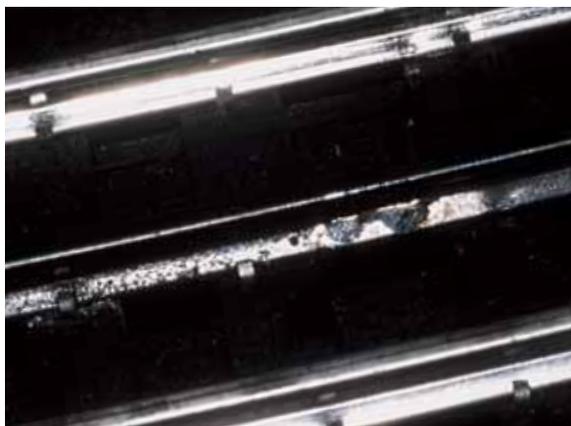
Place the solder and your iron on the rail and slide the iron backward to coat the bare rail with solder. This will prepare the rail to accept the wire.
